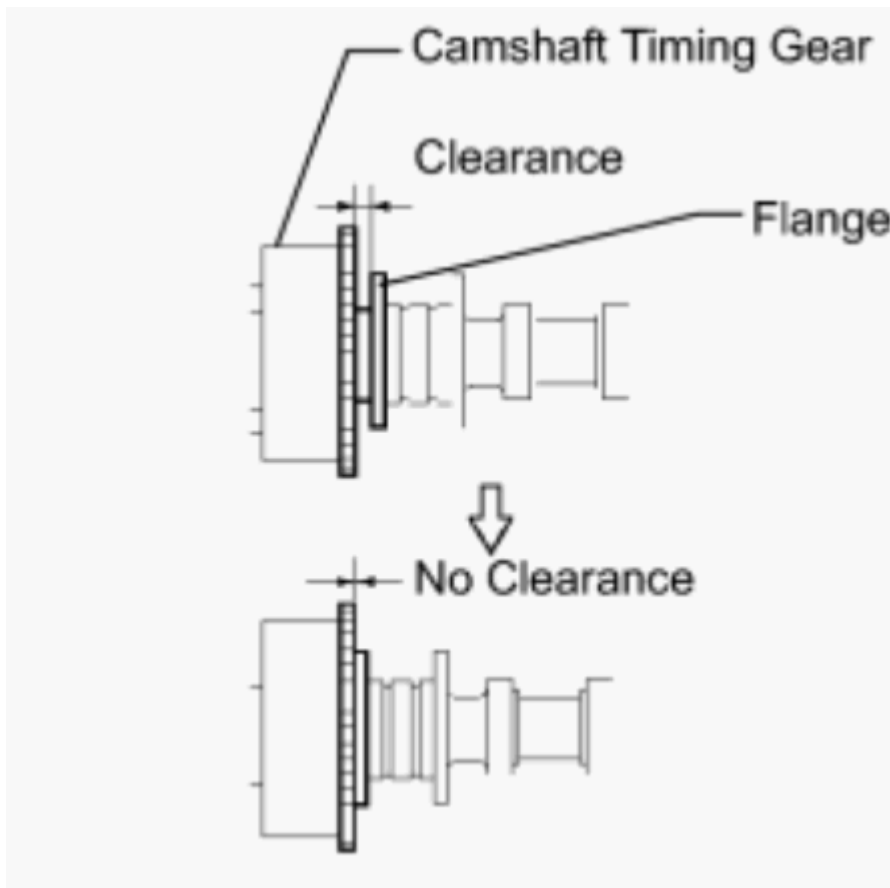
Checking No Clearance Between Camshaft Timing Gear And Camshaft Flange
